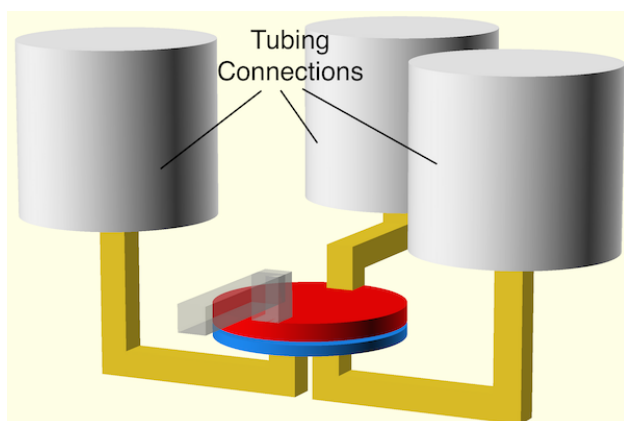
Complete 3D printed valve CAD design includes cylindrical holes in which to connect PTFE tubing.
